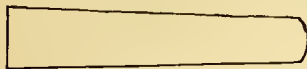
HAMMER OR CONTACT-BREAKER.
